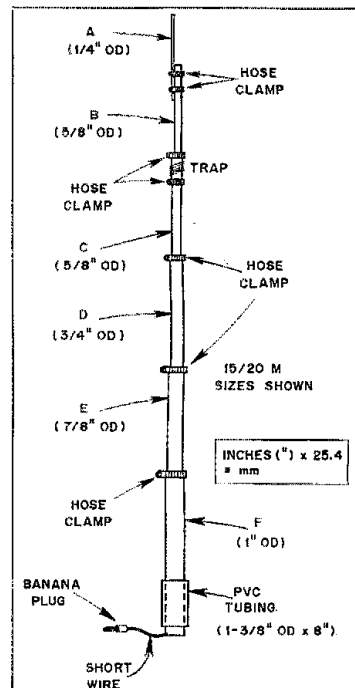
Assembly details for the two-band trap vertical. The coaxial-cable trap capacitor is taped to the lower end of section "B."
